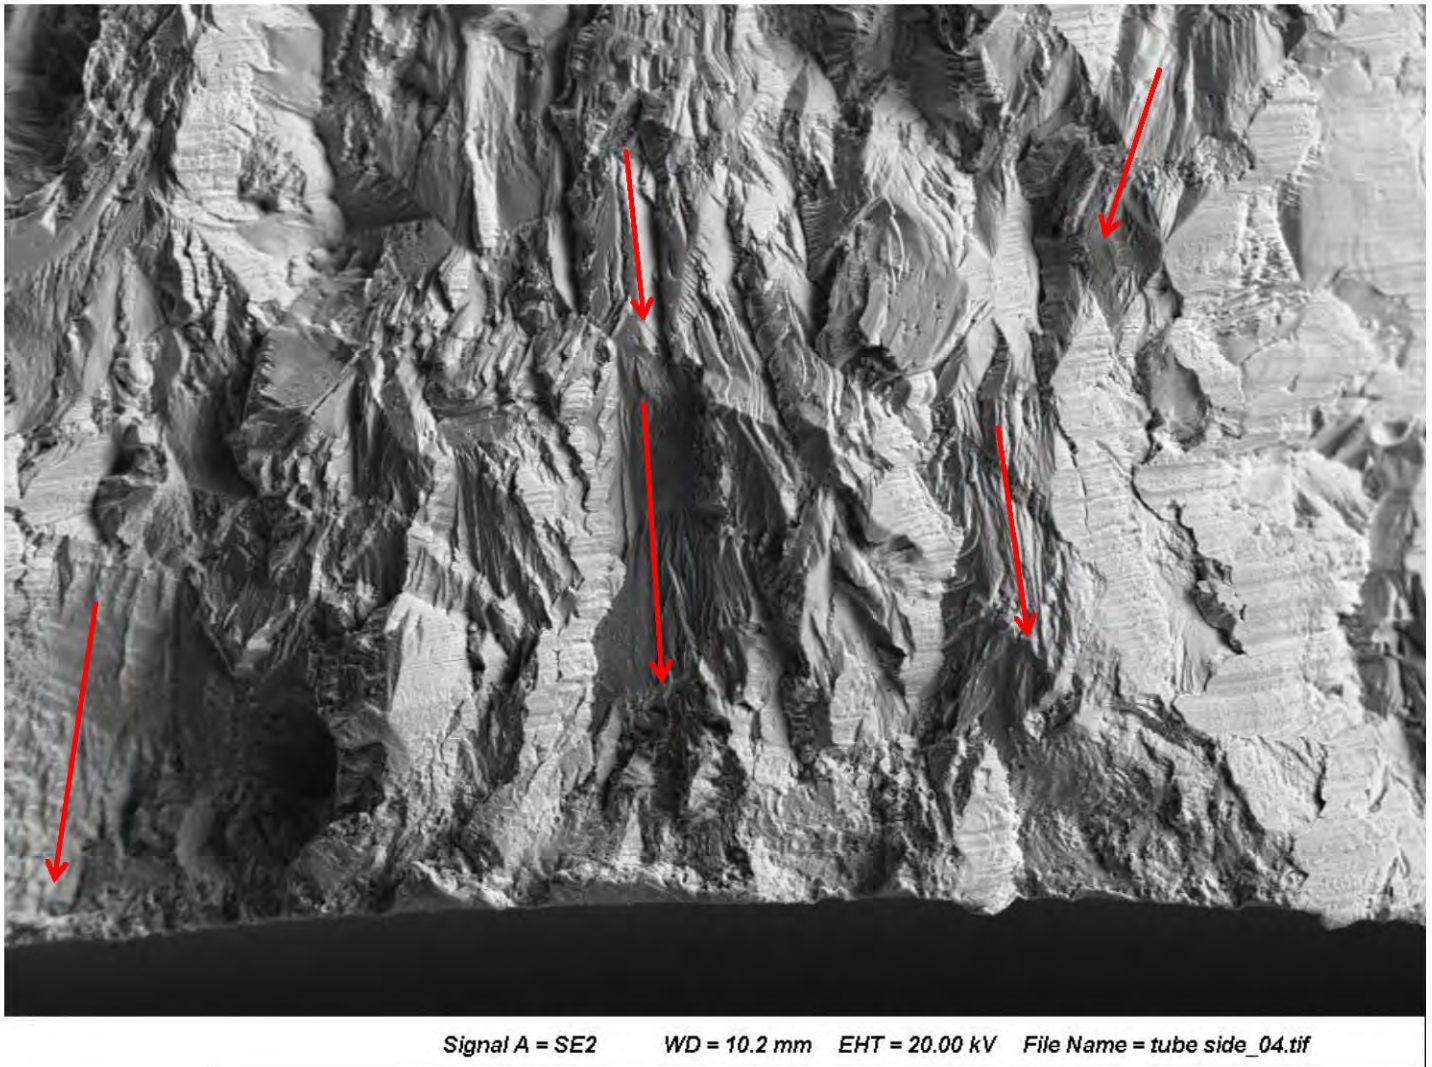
SEM image showing fatigue fracture features (red arrows) extending through the thickness of the tube on the tube side fracture surface.
